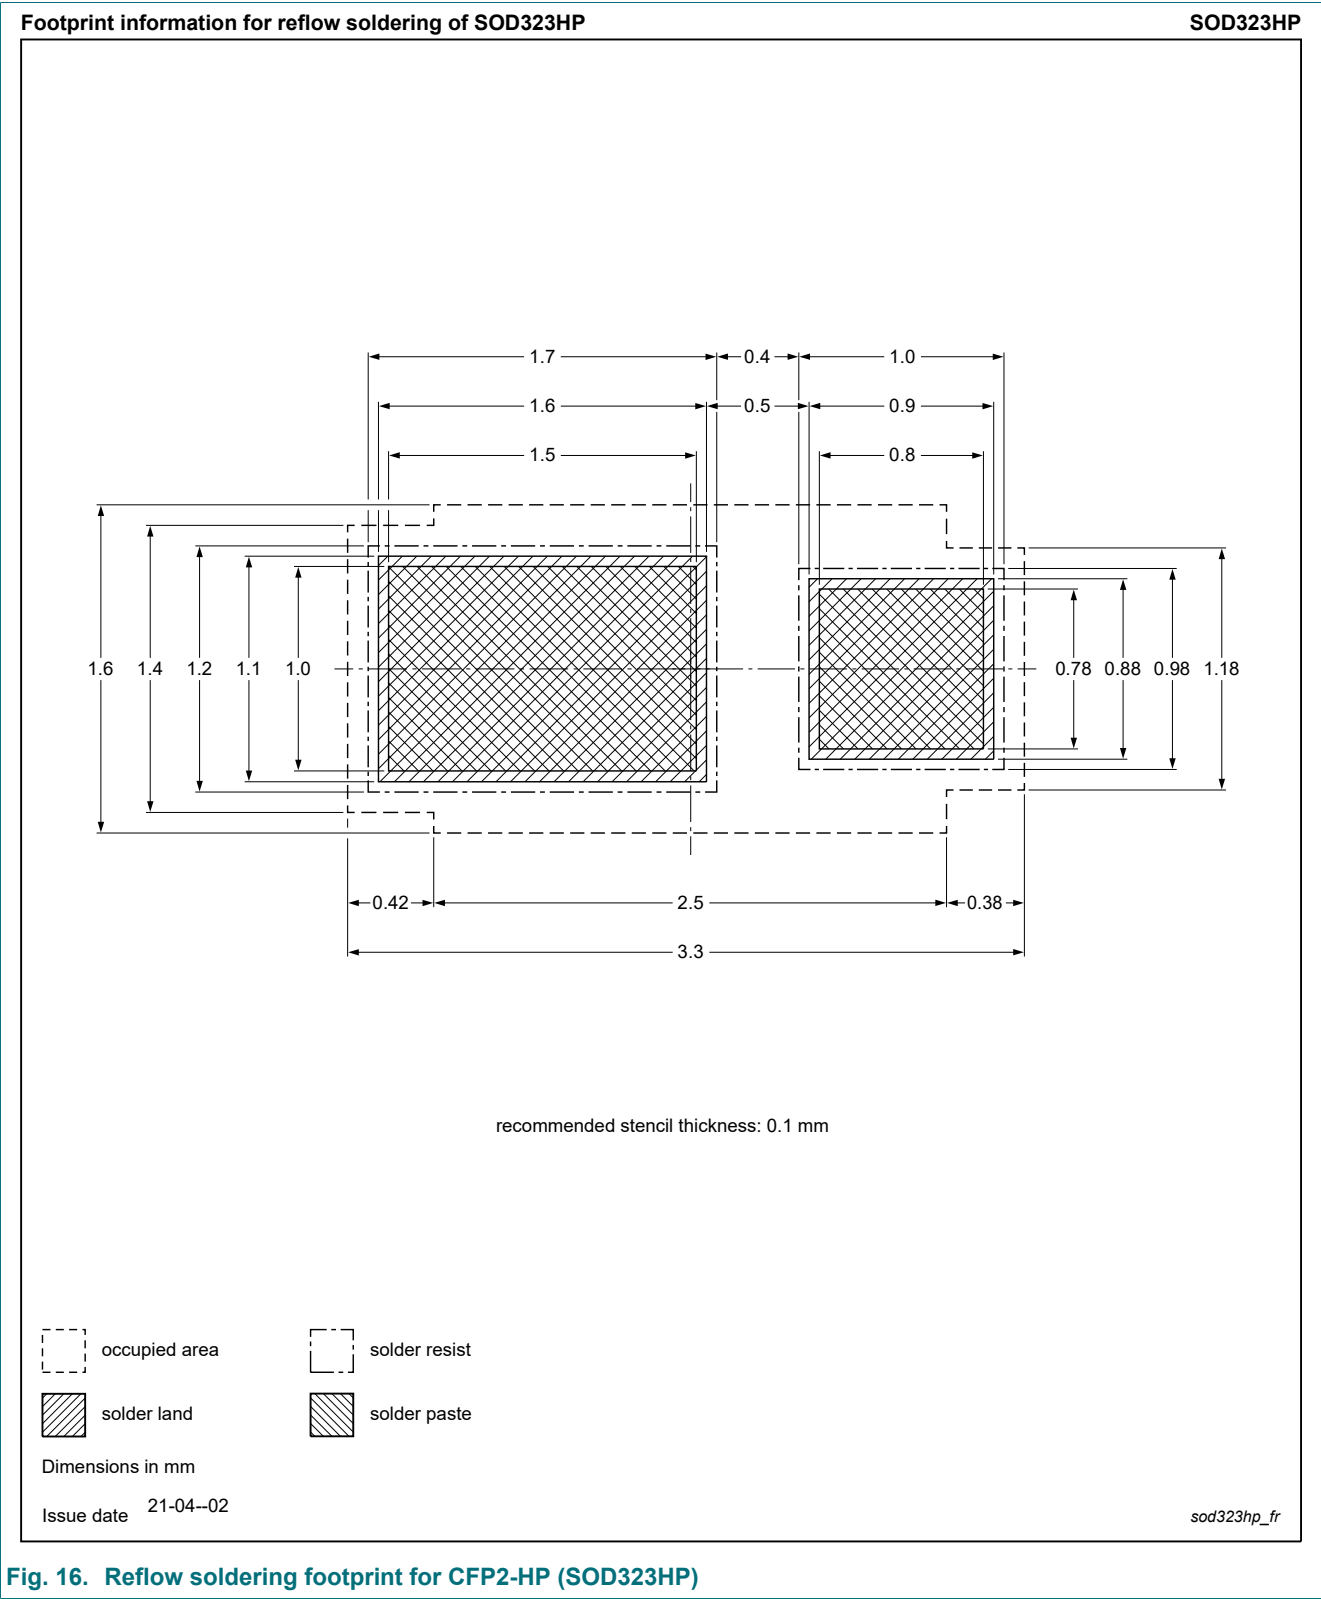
Reflow soldering footprint for CFP2-HP (SOD323HP)
